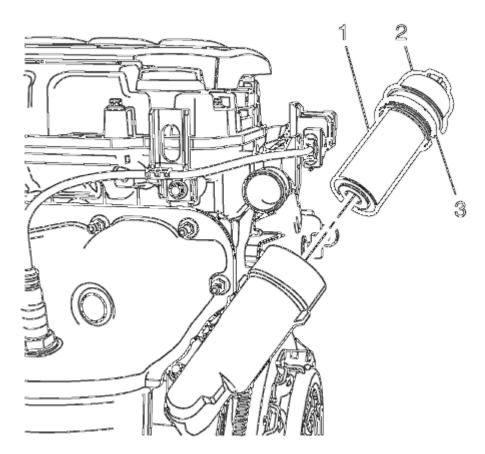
Engine Oil Filter Cap, Cap Seal Ring And Oil Filter Element Courtesy of GENERAL MOTORS COMPANY
